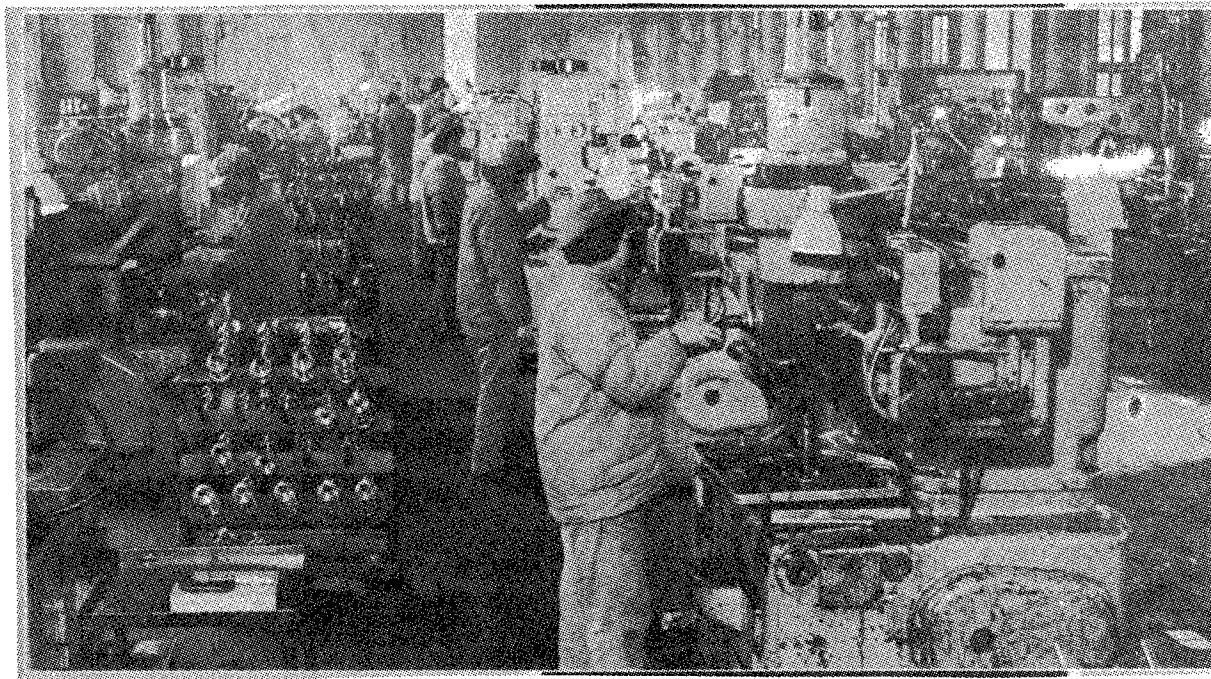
Inside view of the Zhujiang City Machine Tool Plant in Hunan
